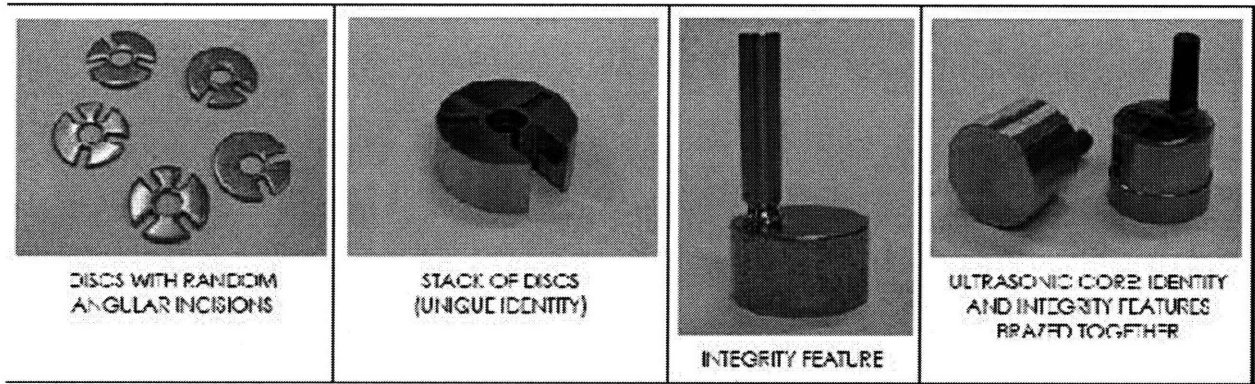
Seal Core and Tamper Indicating Feature (16)
